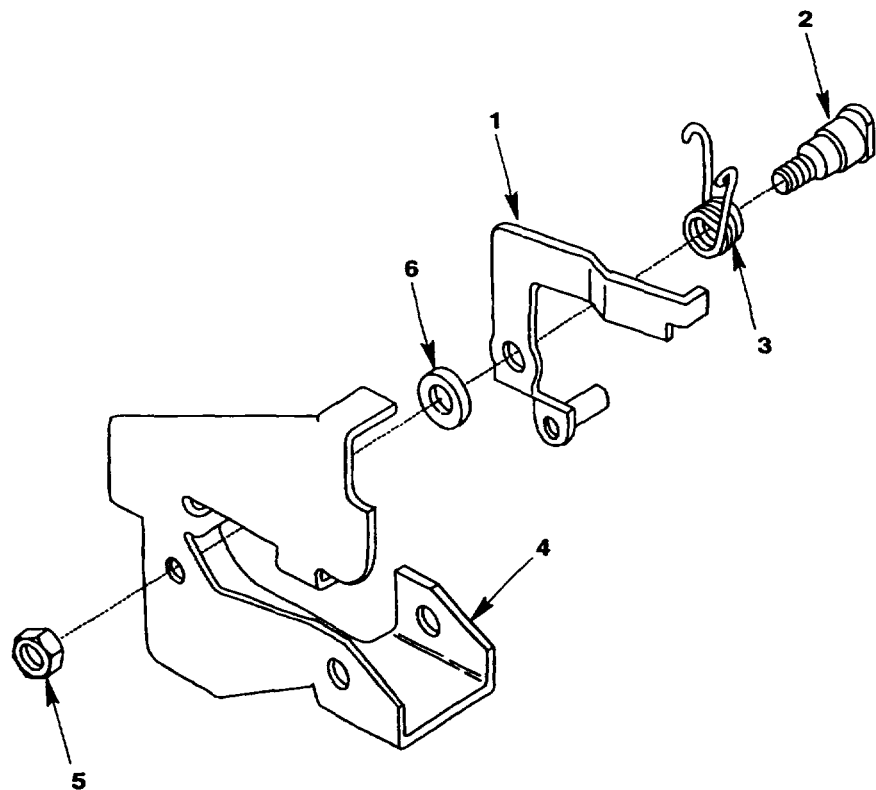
Actuating Assembly, Trigger, M240E1, PN 12597071
